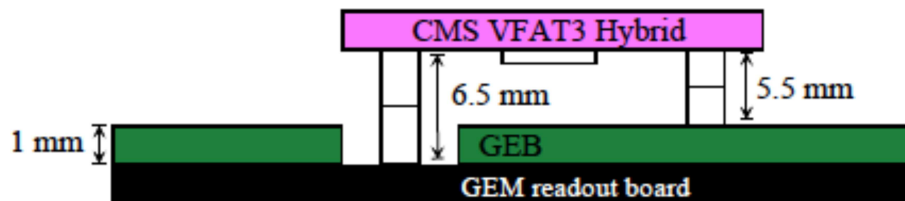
Schematic cross-section of the GEB placed on top of the GEM readout board. One VFAT3 hybrid and its connections to the GEB and the GEM readout board is also shown.
